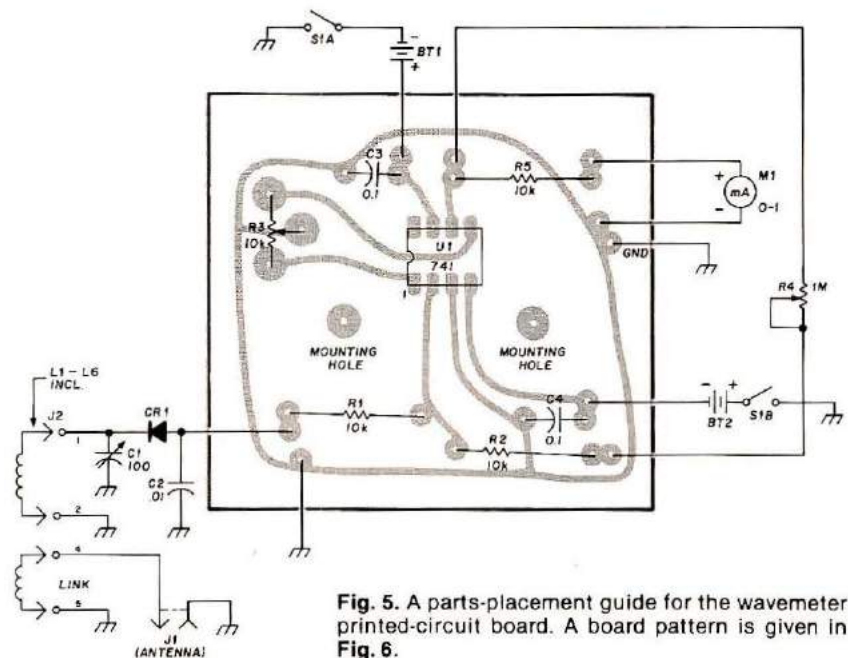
A parts-placement guide for the wavemeter printed-circuit board. A board pattern is given in Fig. 6.
